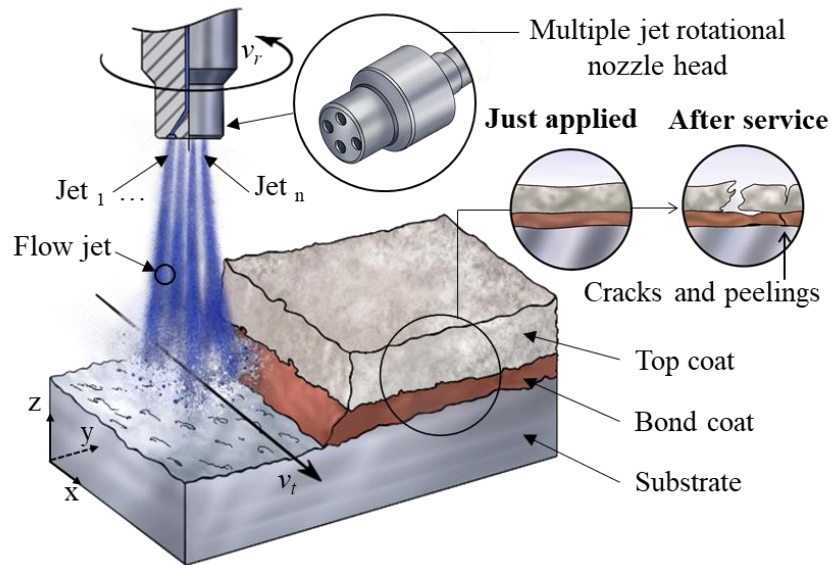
Schematic representation of an example of a multi-layer coating being stripped using high pressure waterjet technology with a rotational multiple plain water jet nozzle.
